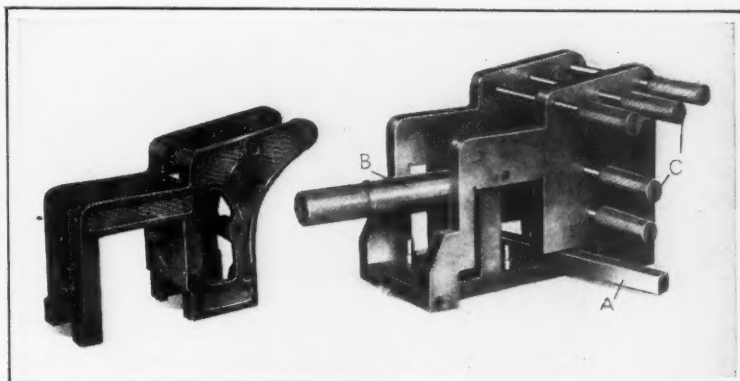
Fixture for Checking Boring, Drilling, and Milling Operations on a Circuit-breaker Frame
